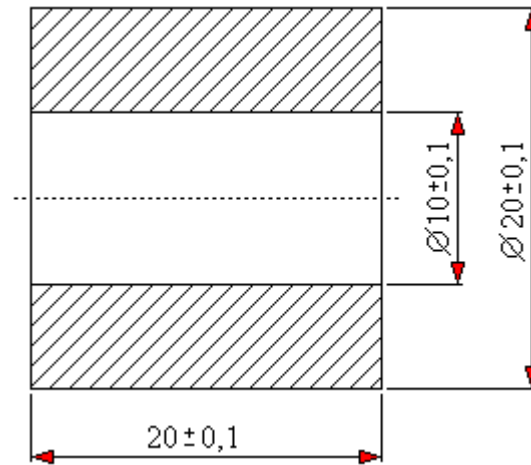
Bushing for the turntable arm made of S355J2 steel grade
